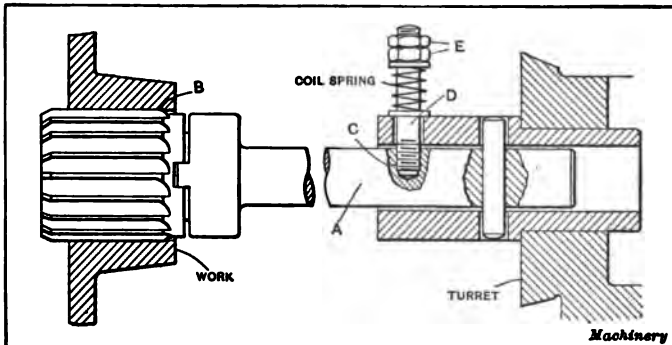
Method of Balancing a Reamer Holder with a Spring
